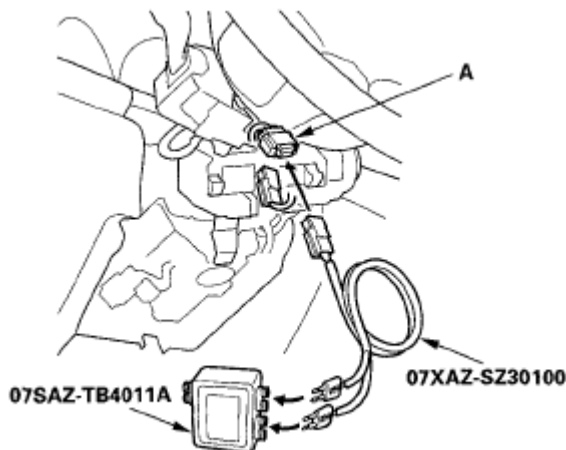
Identifying Dashboard Wire Harness 4P Connector Of Cable Reel
